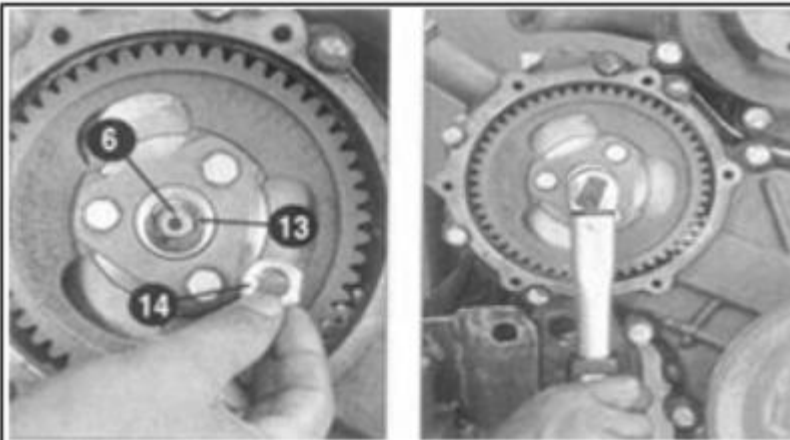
View of crank shaft (Courtesy: Escort Tractor)
